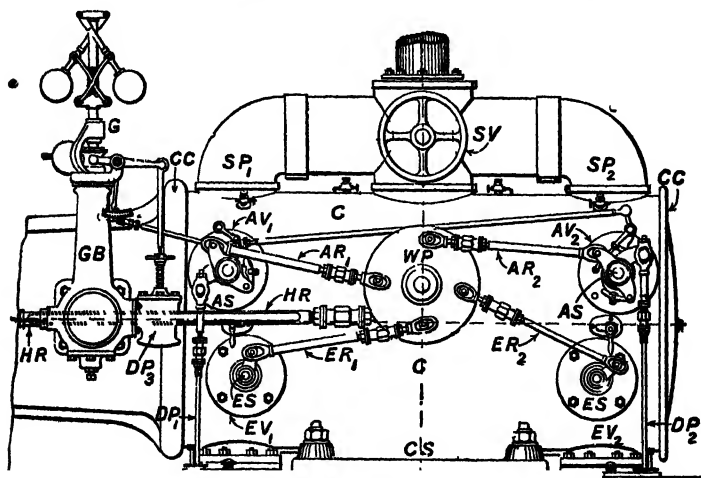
OUTSIDE VIEW OF FARCOT-CORLISS VALVE GEAR.
